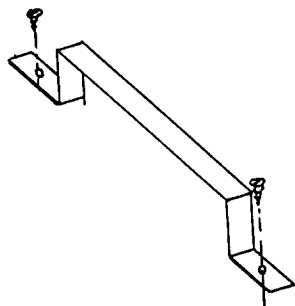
From a similar piece of strip steel construct a clamp for holding the battery, as shown in Fig. 4.
